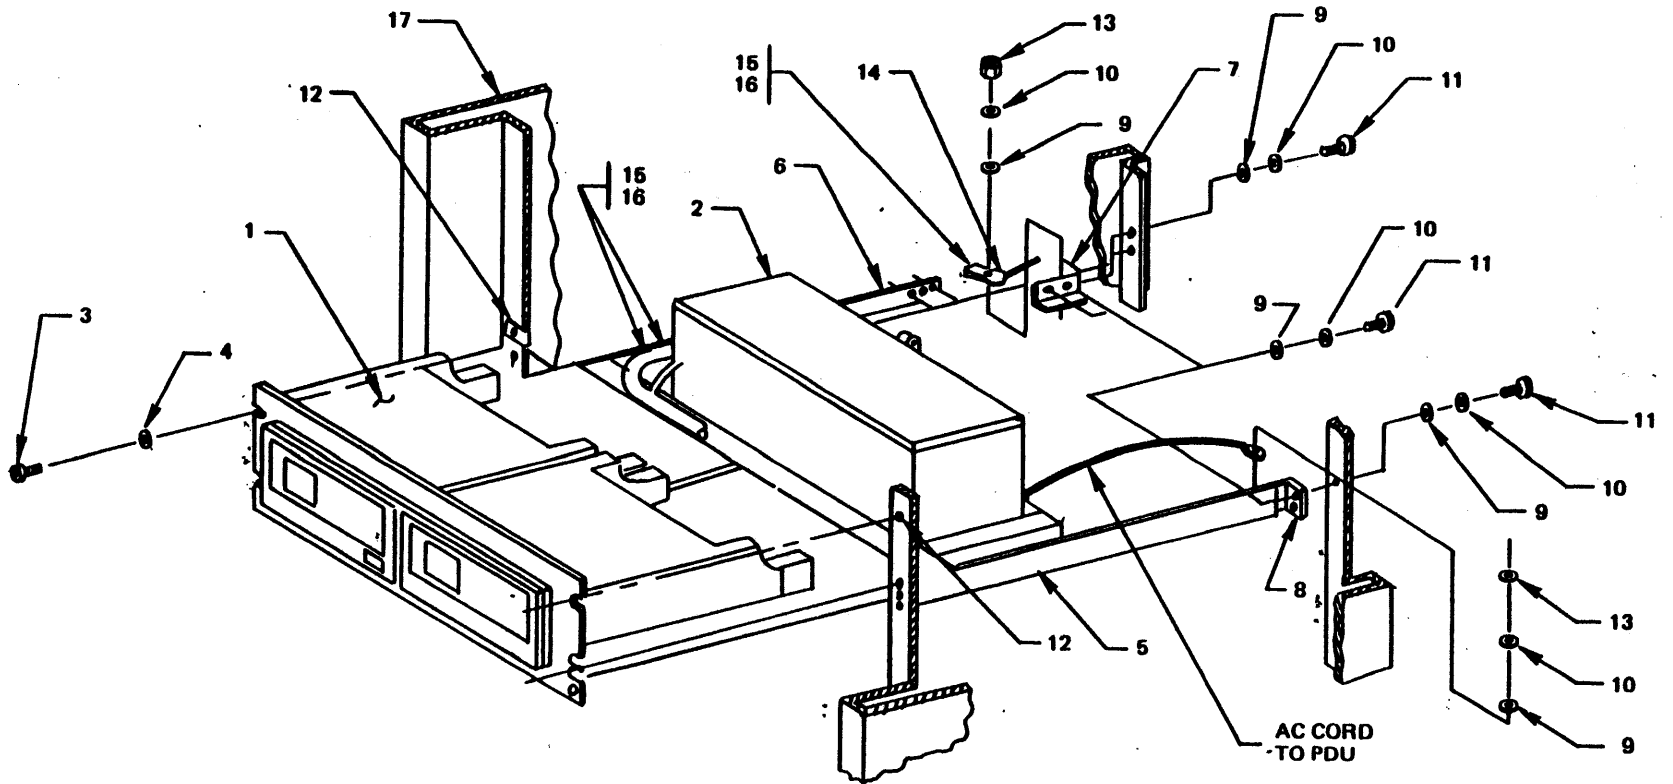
Diskette Tray Assembly (Refer to Table 3-8)
